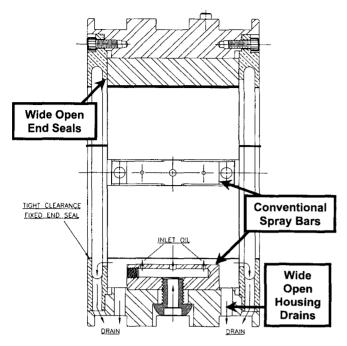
Evacuated Housing, Directed Lubrication Spray Bar Design.
